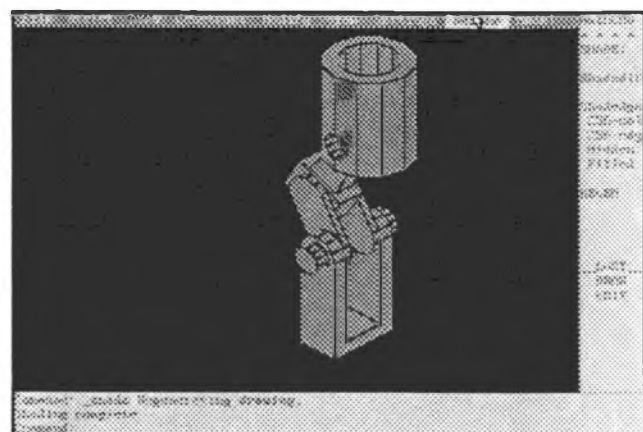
ASSEMBLY FIGURE OF PISTON
